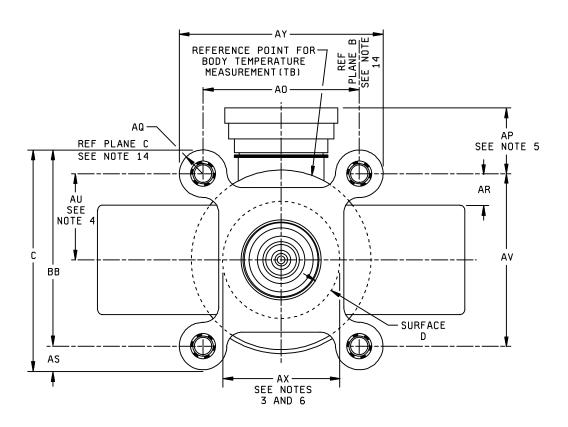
A. Alternate outline drawing of electron tube type DOD-042 (bottom view).
